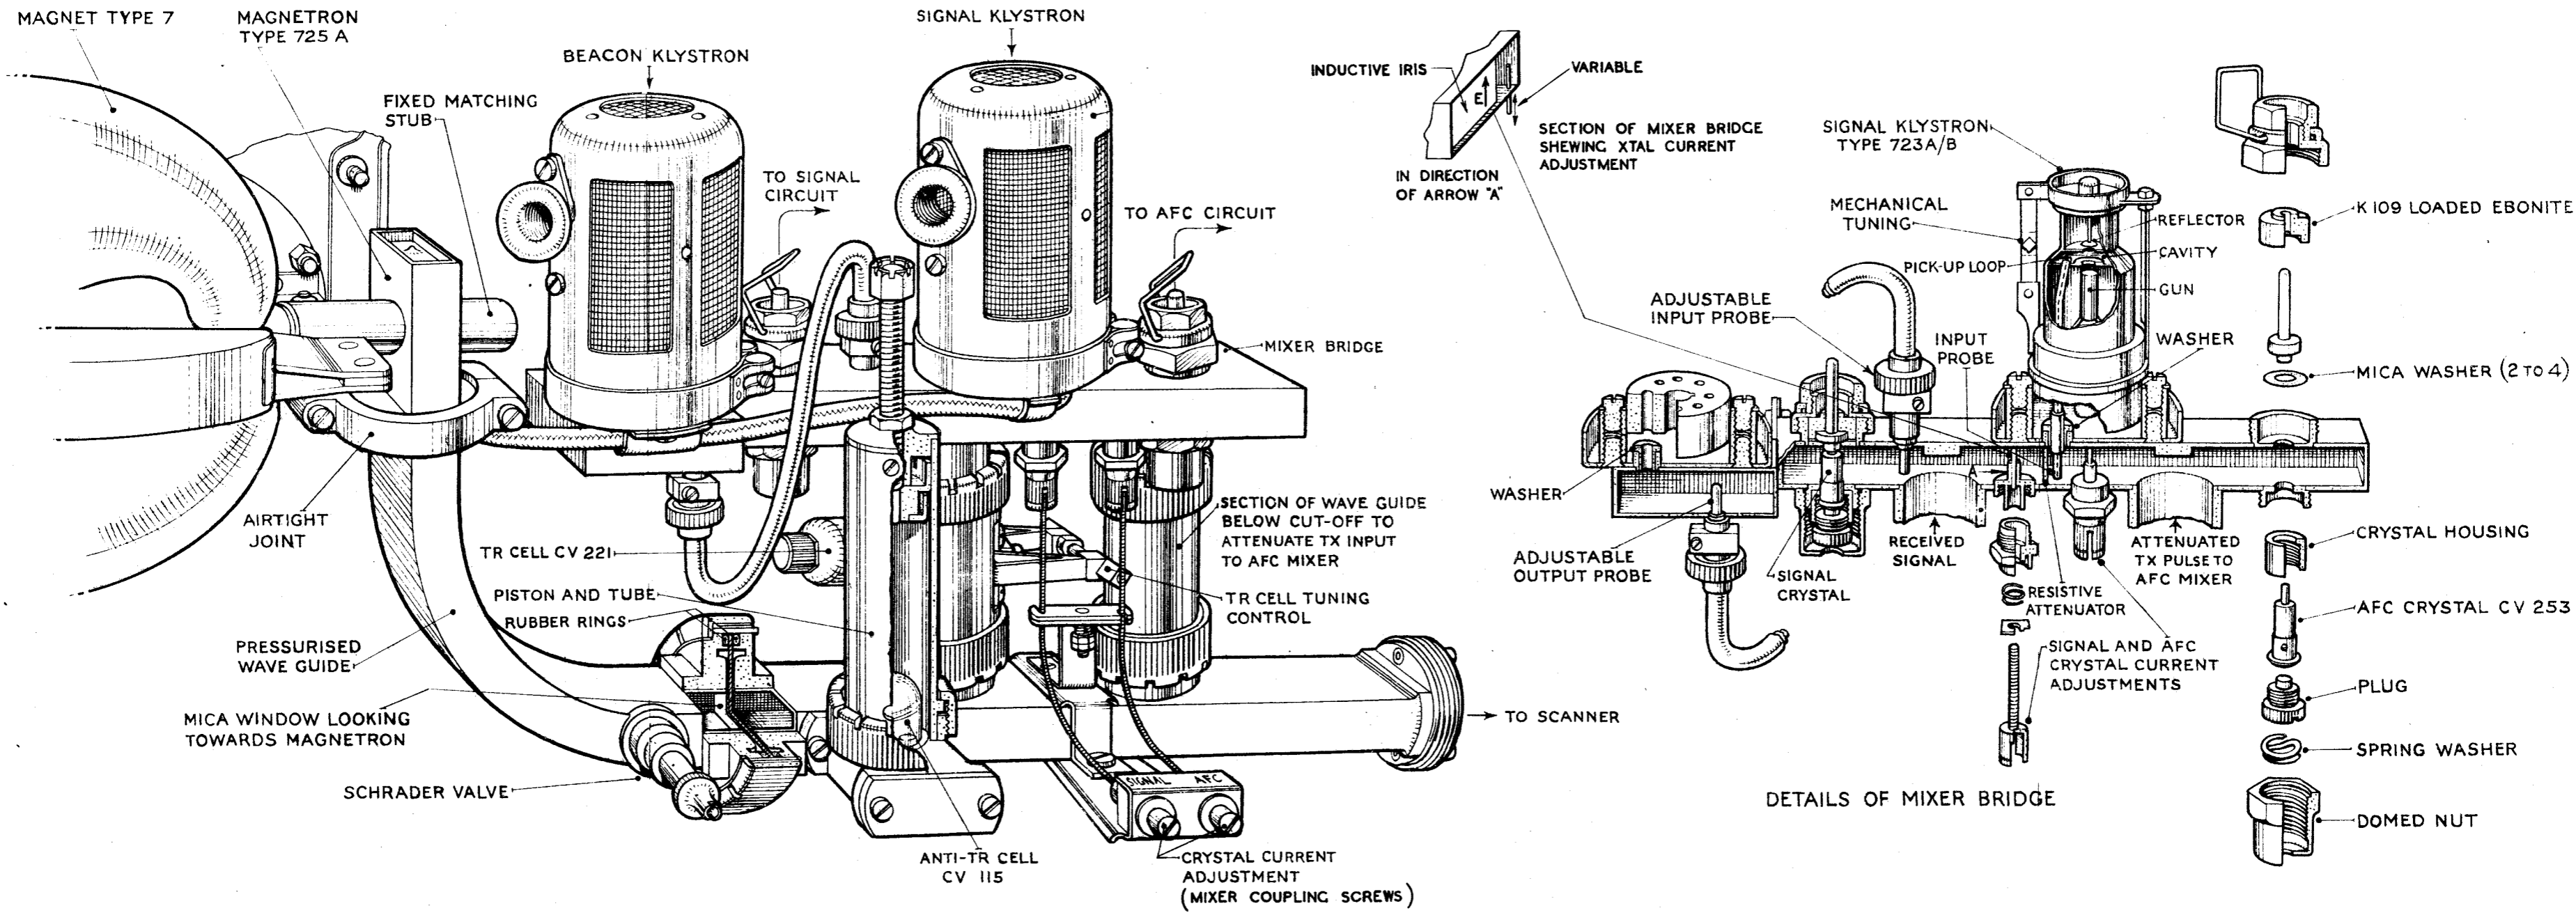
, T.R. 3523 A WAVE GUIDE ASSEMBLY
